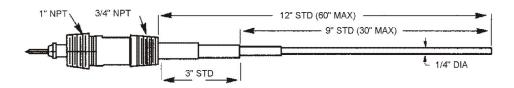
Standard L853 Probe, Dimensional Drawing
